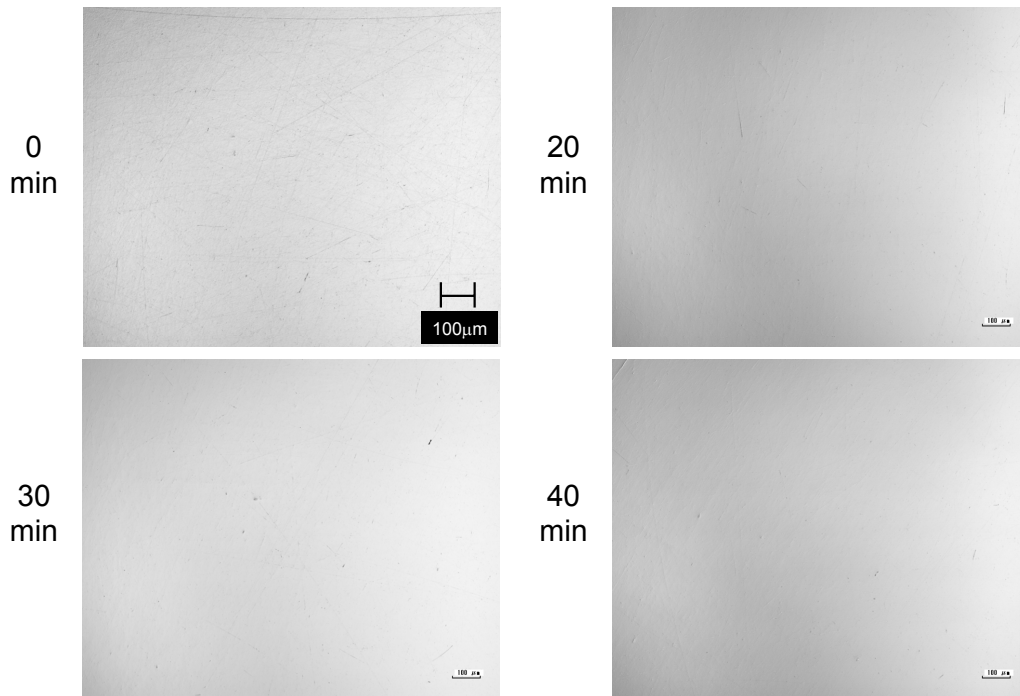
Surface of workpiece at the peripheral part ( # 4000 )
